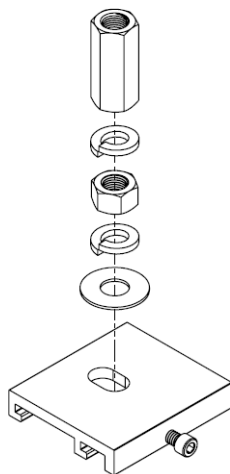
Flat Washer, Lock Washer, Hex Nut Assembly
